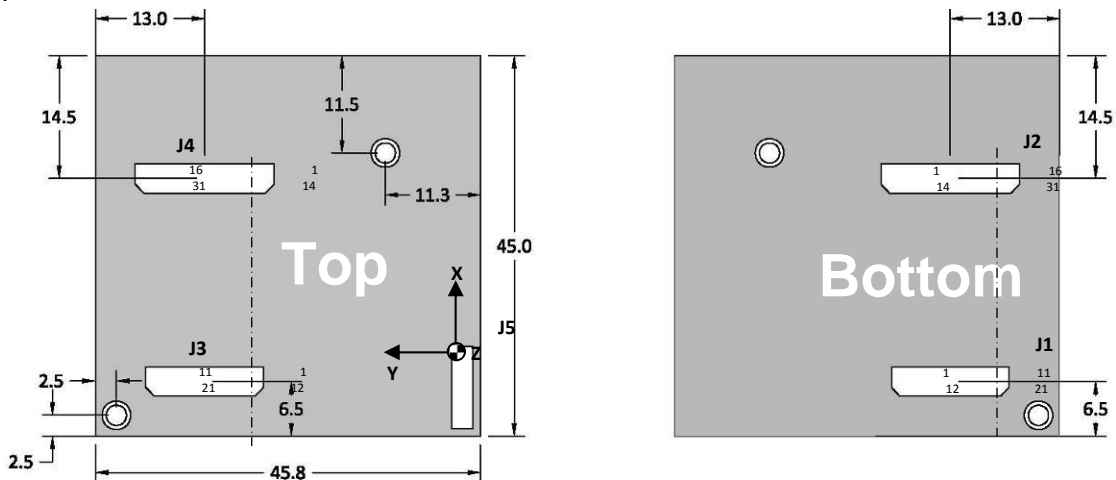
SHM-A dimensions (all dimensions in mm).
